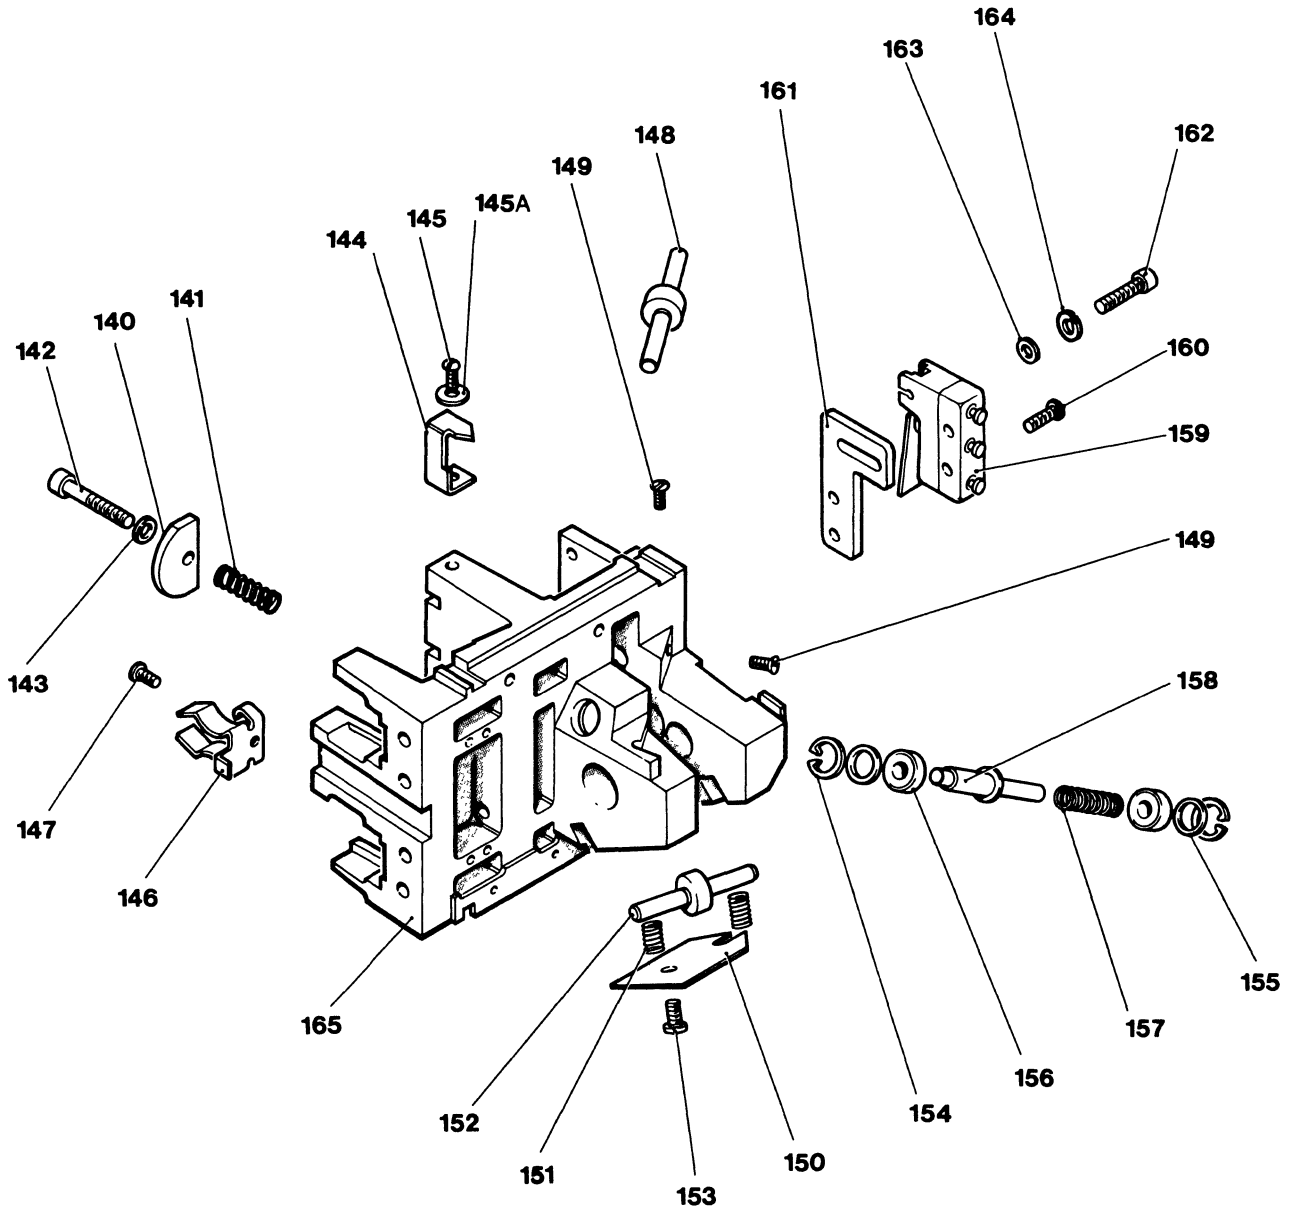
ACTUATOR ASSEMBLY (PART 4 OF 4)
